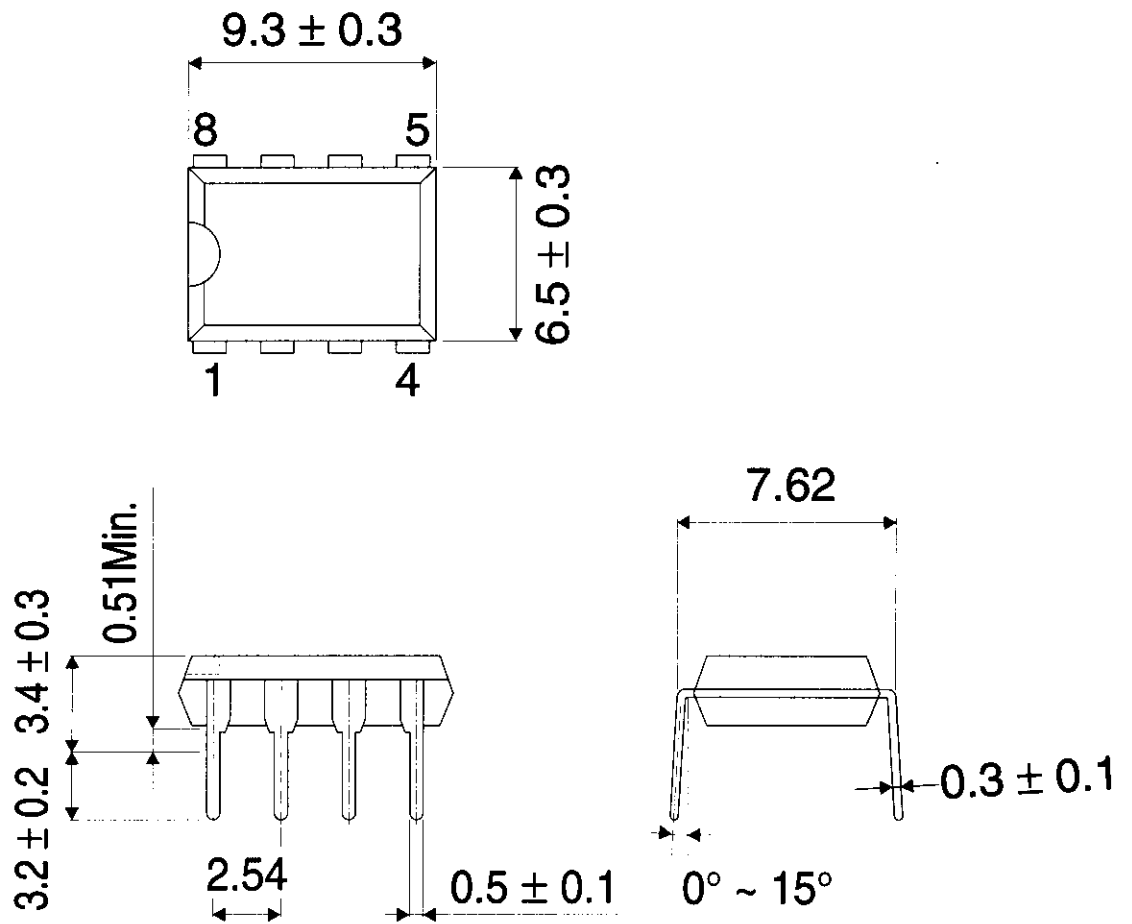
Outline Dimensions DIP8(BR93L66-W)
